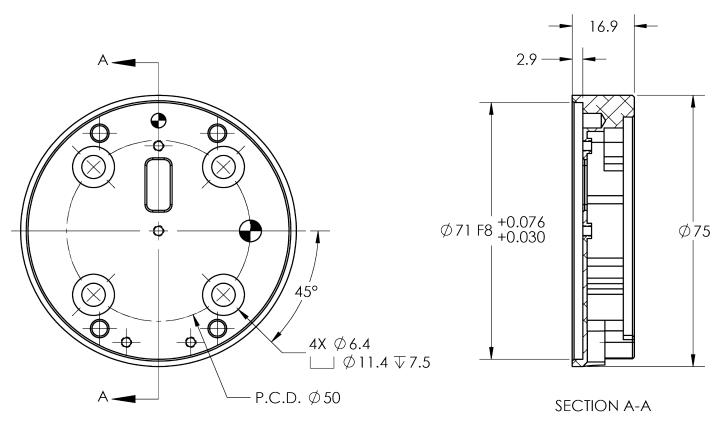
Coupling for ISO 9409-1-50-4-M6.
